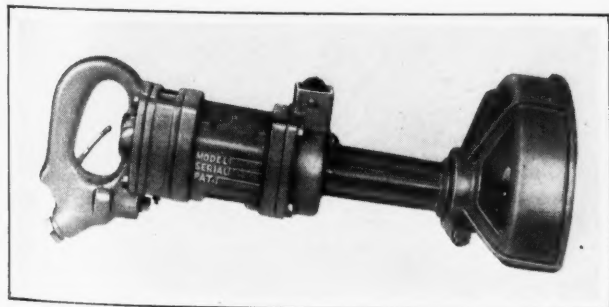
"Thor" Rotary Air Grinder with Grip-handle Throttle
